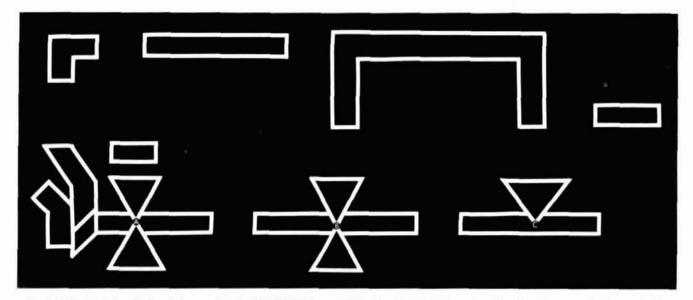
Full-size printed-circuit layout for the 432-435 MHz converter. Component placement for the converter is shown in the photograph. Transistor mounting holes marked A, B, and C are 5/16 inch (8 mm) diameter.
